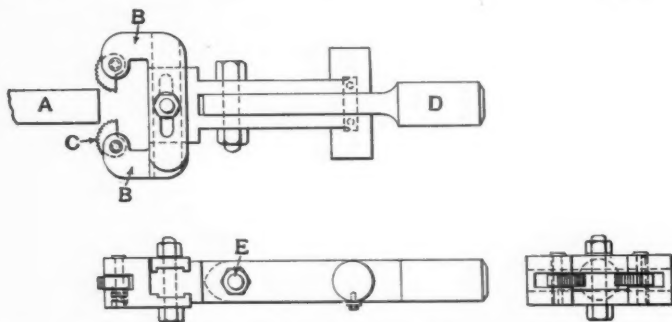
Adjustable Jaws for Pulling Work Through the Head of a Turret Lathe.
